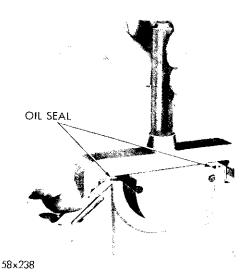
Trimming Rear Main Bearing Lower Oil Seal
